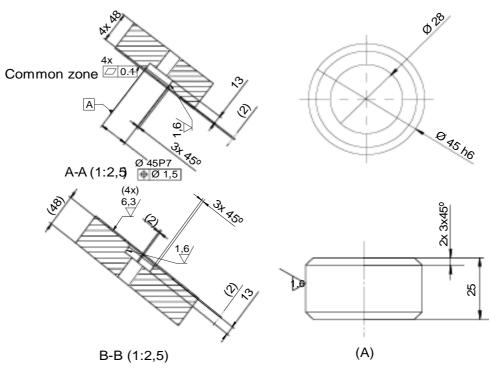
Sections of base plate and guide sleeve (dimensions in mm).
